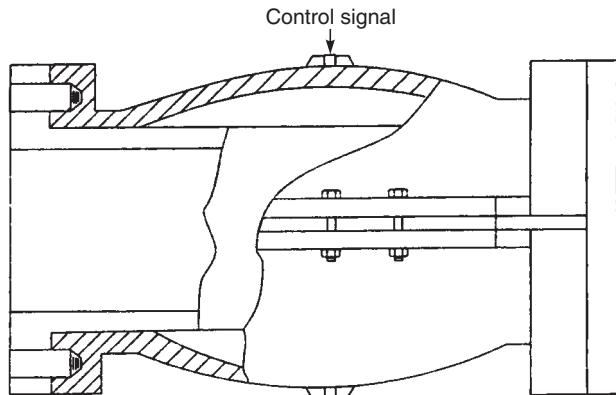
Pneumatically clamped pinch valve [Courtesy—Red Valve Co.].
